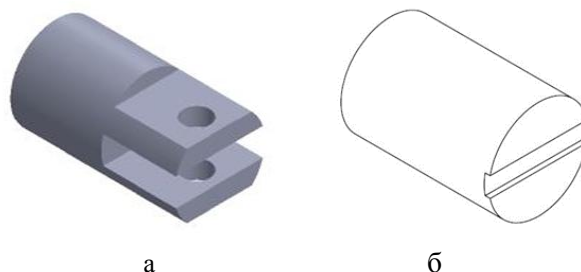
Schemes of clamps of the inner (a) and outer (b) cage of spherical bearings.
